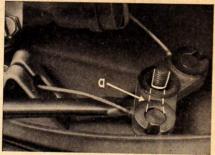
Pressing VI / 56 / 1759 gear shift lever out a = from eng. No. 01 020 008 the gear shift lever is scribed with "top"
